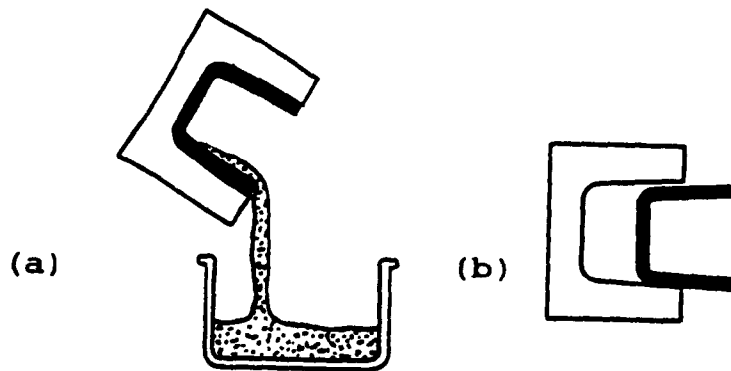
Drain casting: (a) excess slip is drained; (b) and casting is removed after partial drying (after Ref. 4).
